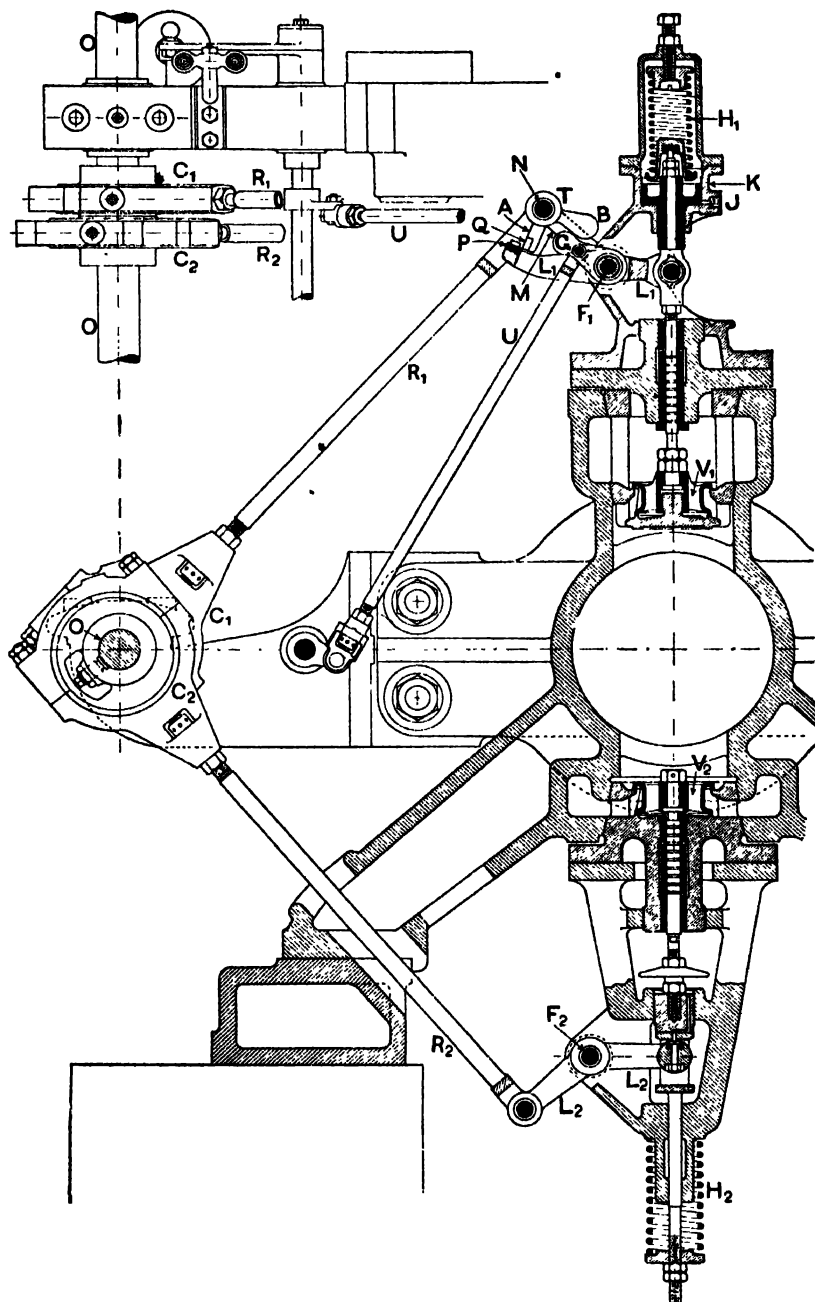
Drop valves and valve gear for H.P. cylinder of compound engine.
